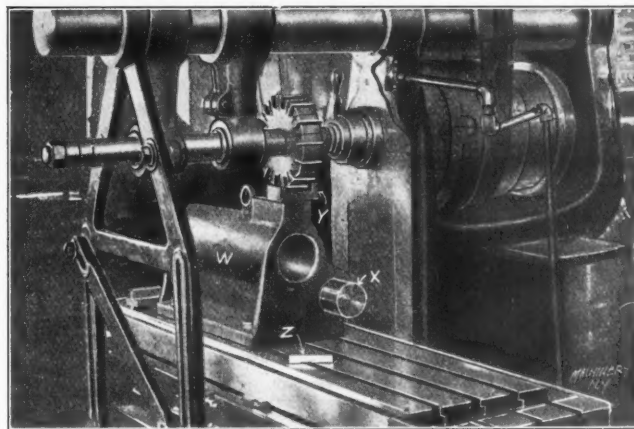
Setting the Mill for Cutting the Slots for the Indexing Blocks, using a Gage fastened to the Fixture.
